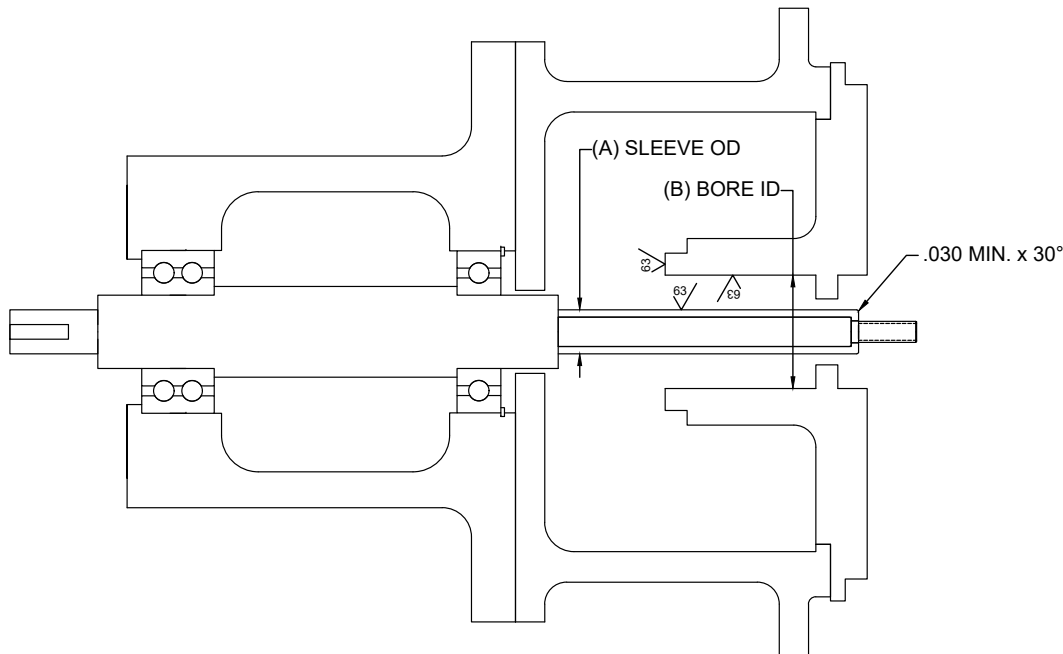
Surface finish and chamfer locations. Fully assembled pump without seal.
